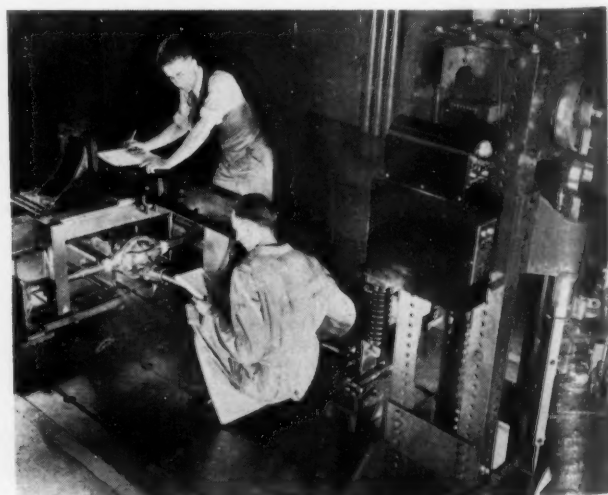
shows a close-up view of a steering and third arm mounted on a support plate with the load applied to the steering ball.
